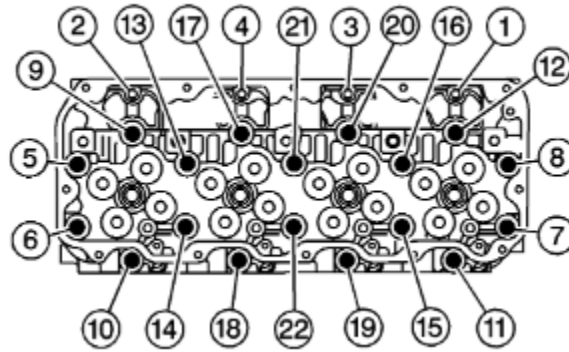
Driver and passenger side cylinder head bolt removal sequence
